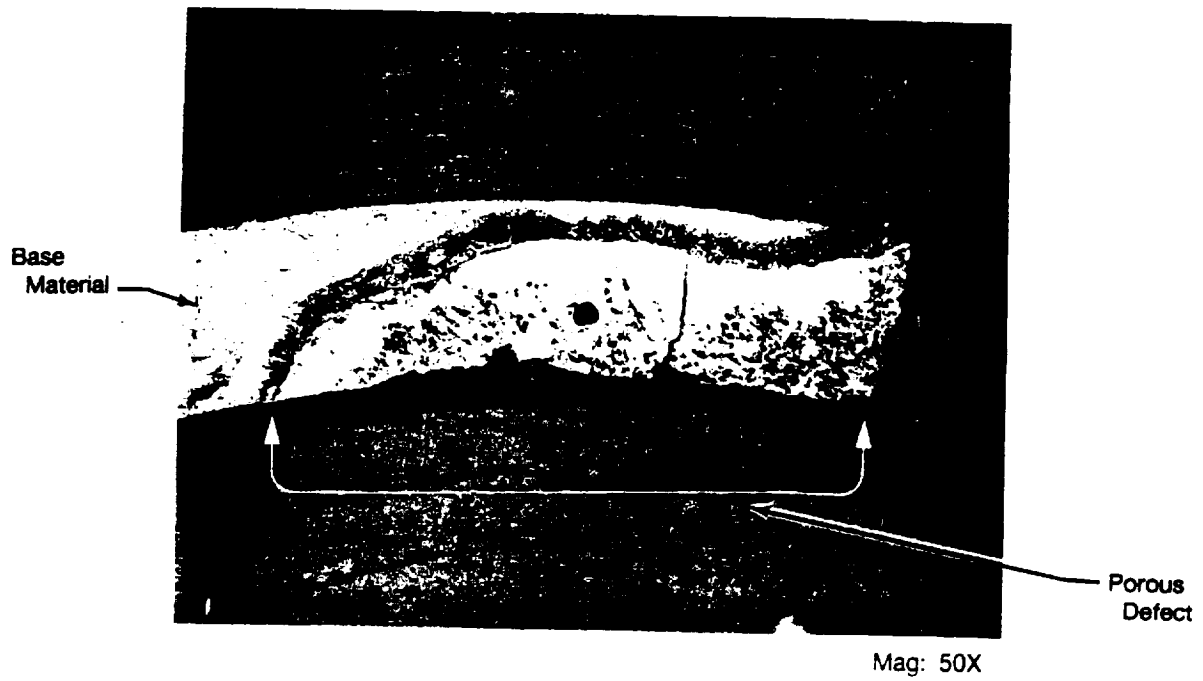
Cracked Outer Row Oxidizer Element
